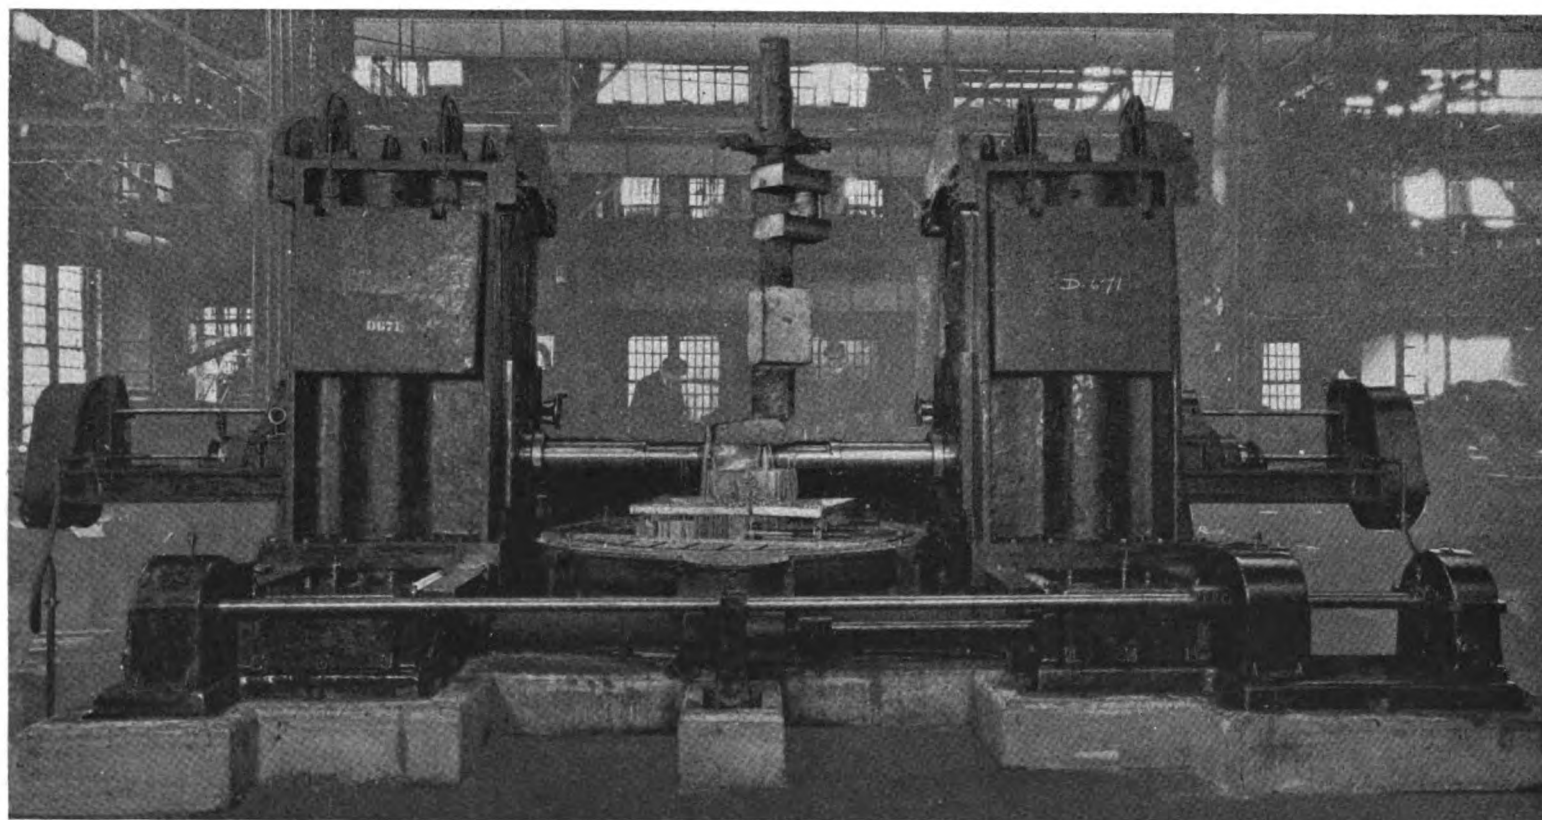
The Burmeister & Wain crankshaft machine-tool at the Midvale Steel Works
